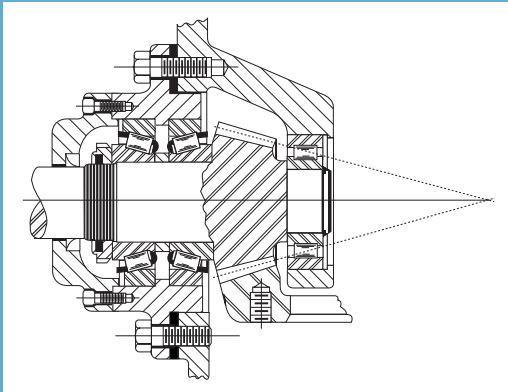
Straddle pinion mounting for short shafts showing use of combined thrust and radial bearings. Gear mounted in oil-tight case.
